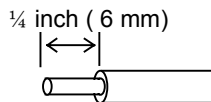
Wire Terminal on Option Connection Terminal Side.
